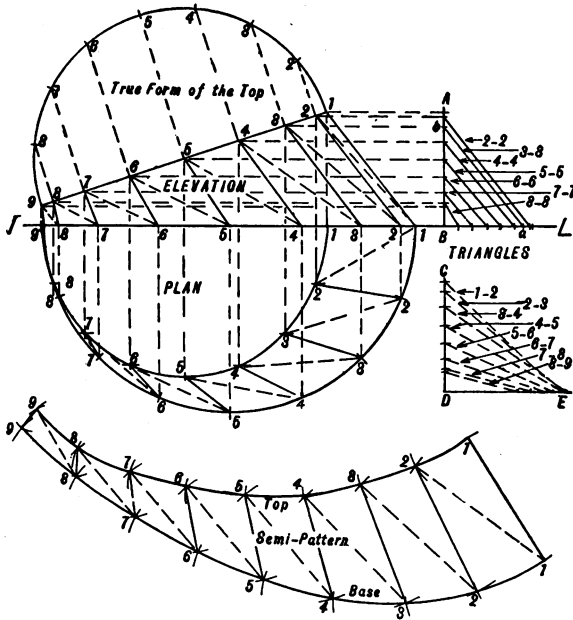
Plan, Elevation, Diagram of Triangles and Semi-pattern for One Piece of a Ship's Ventilator.
